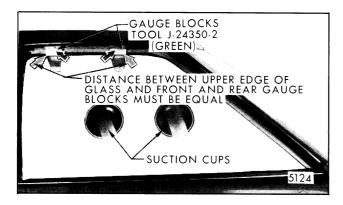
Front Door Window Alignment (Rotated "Cocked Glass" in Body Opening Adjustment)
